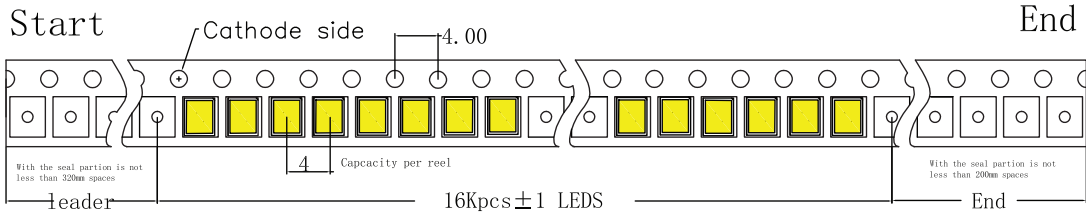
Pocket tape dimensions for LUXEON 2835 Commercial (L128-xxxxSA35A00Gx & L128-xxxxSA35A00Hx)
